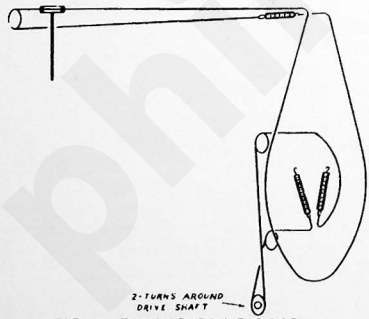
TUNING DRIVE CORD ARRANGEMENT
